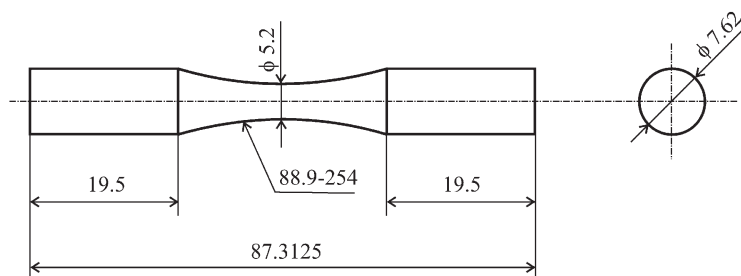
Rotating bending fatigue test specimen dimensions (in mm).
